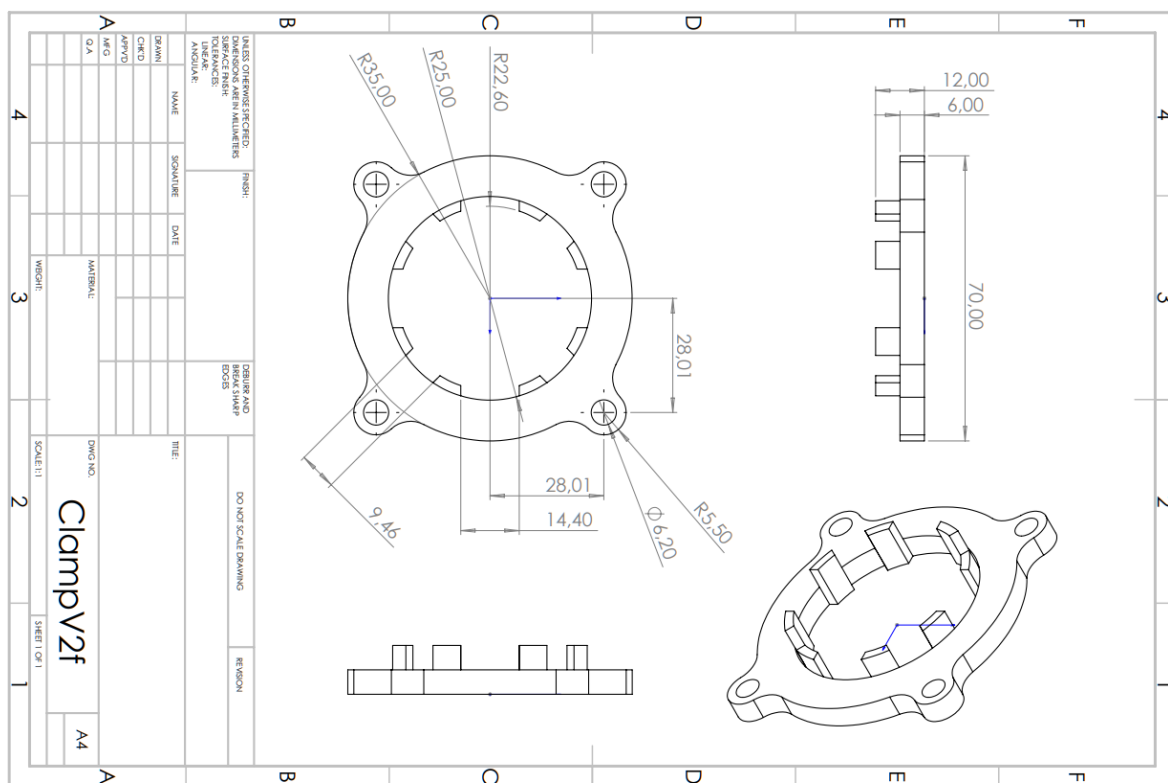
Technical drawing of the second (and final) version of the Clamp, female part of the set.
